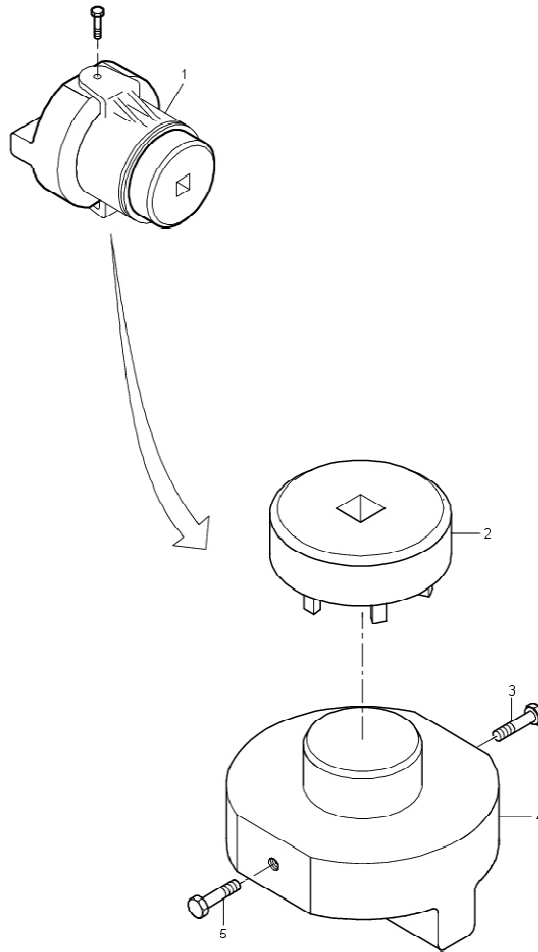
Pitch change slider ring nut removal (Sleeve assy P/N 109-0130-94)
